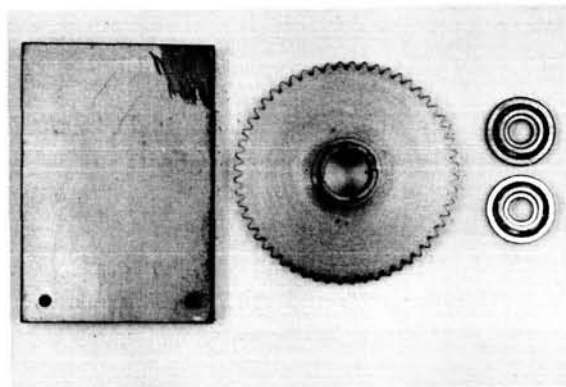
Typical specimens coated with the *in situ* film. Mag. 1X; reduced for printing.
